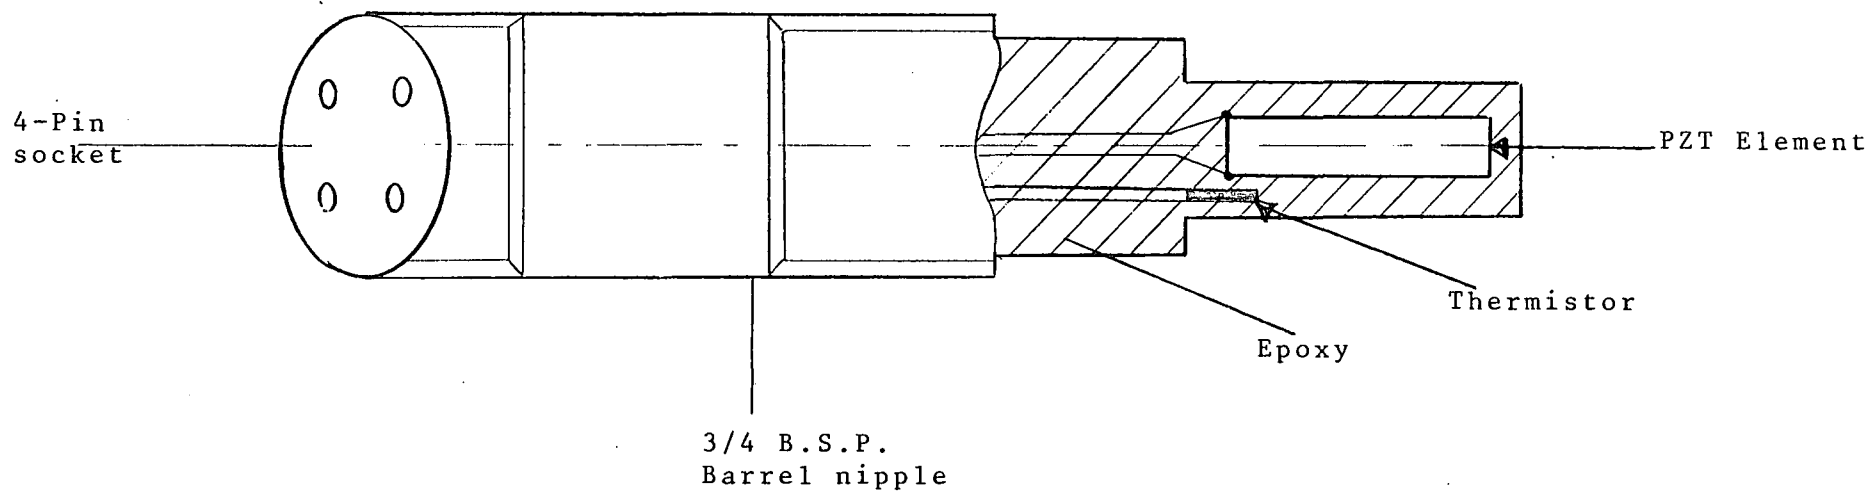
DIAGRAM SHOWING CONSTRUCTION OF PROBE ASSEMBLY
